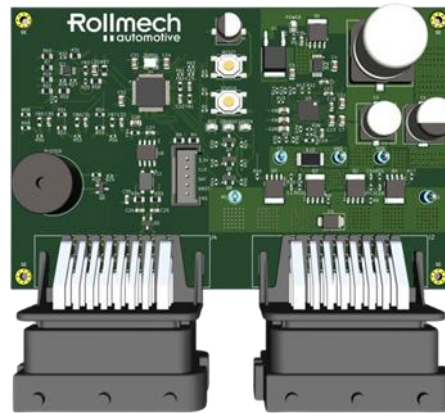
H-Bridge Brushed DC Motor Driver Circuit Board Front Side 3D Image
